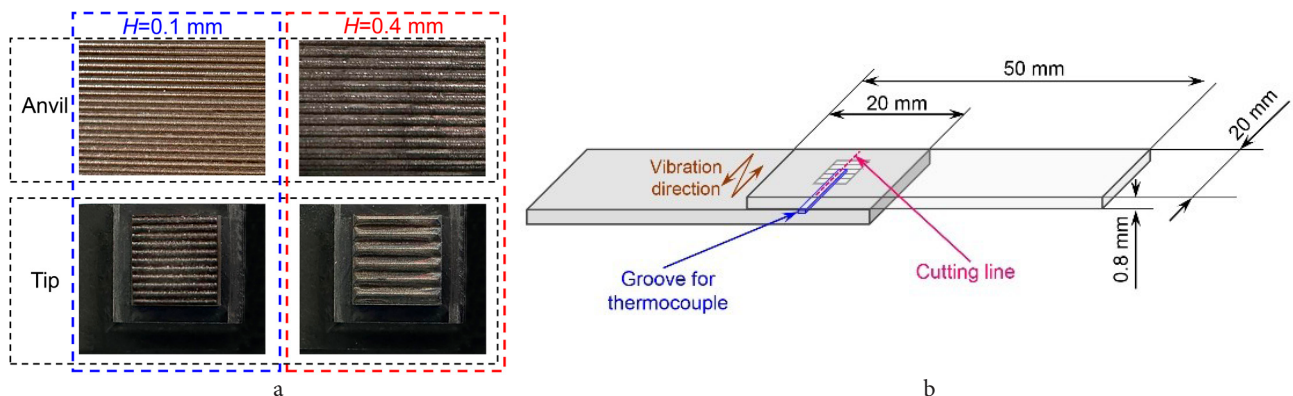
(Color online) Photographs of welding tools (a); schematic illustration of a welded sample with a groove for a thermocouple when measuring temperature (b).
